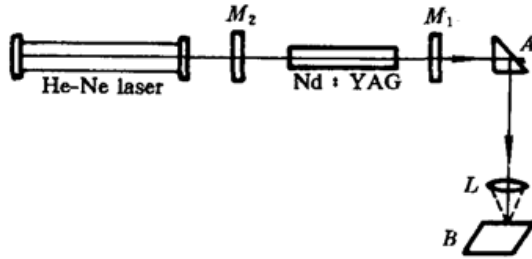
Geometry for Nd:YAG welding machine. M_2 is a highly reflecting mirror, M_1 is the output mirror, A is a prism and L is a focusing lens
